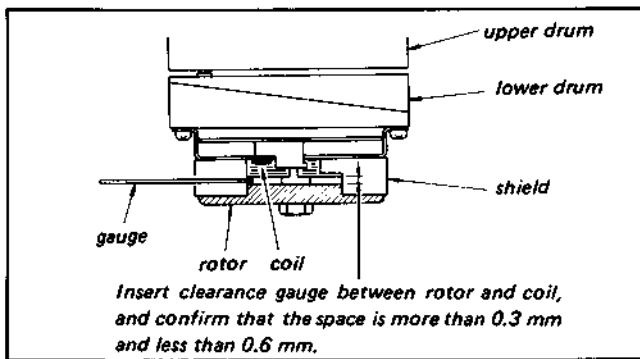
Checking the motor gap width after replacing the drum assembly
